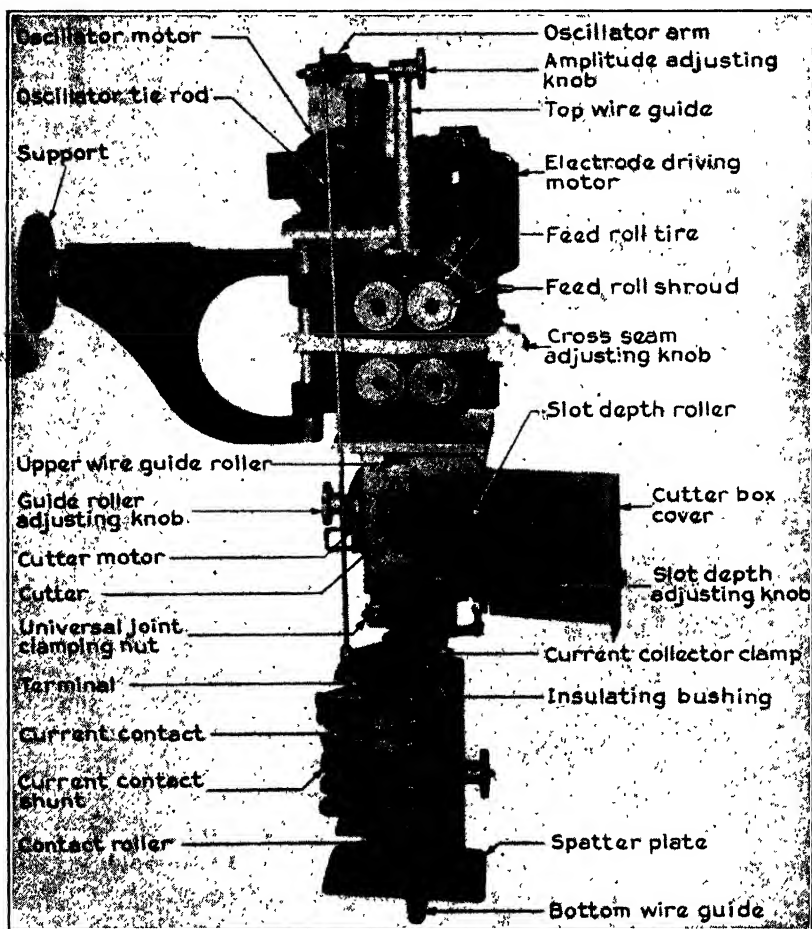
Automatic arc welding head for use with heavily coated electrode.
